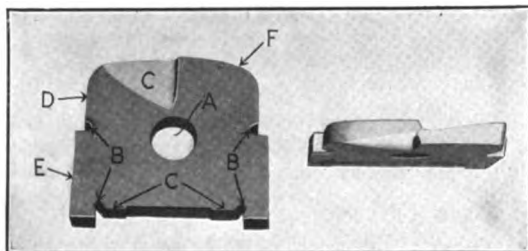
BORING CUTTERS FOR 3-IN. SHRAPNEL SHELLS
